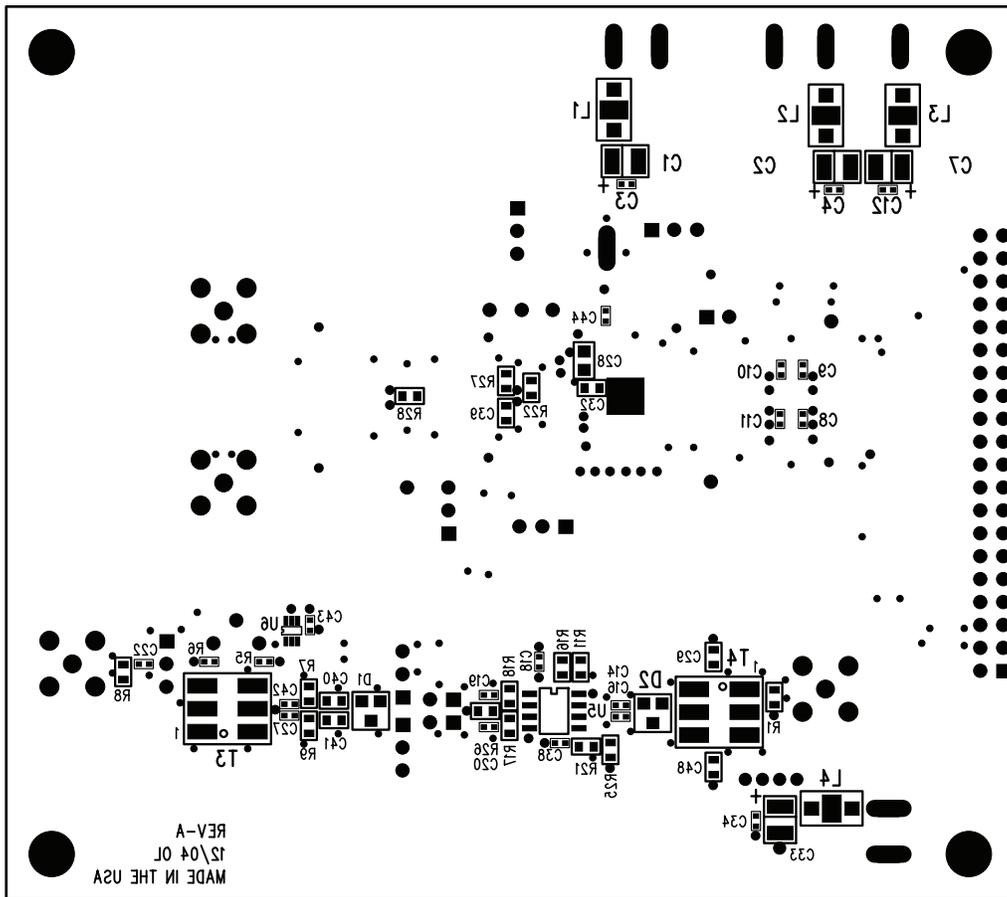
MAX12555 EV Kit PC Board Layout—Solder Side
